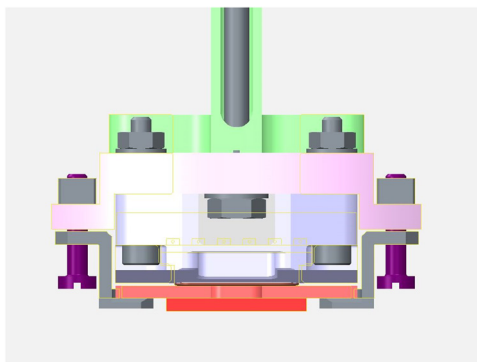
Cut-through of the sample heater assembly. The upper section (green) shows the substrate coupling that attaches to the alignment hexapod, whilst the pink section and purple fixtures indicate the spring loaded sample clips that hold the transferable sample holders rigidly during measurement. The blue section is the machinable ceramic heater, housing a Nichrome heating wire to enable heating in oxygen or ambient atmospheres. The transferable sample plate and sample are shown in red.
